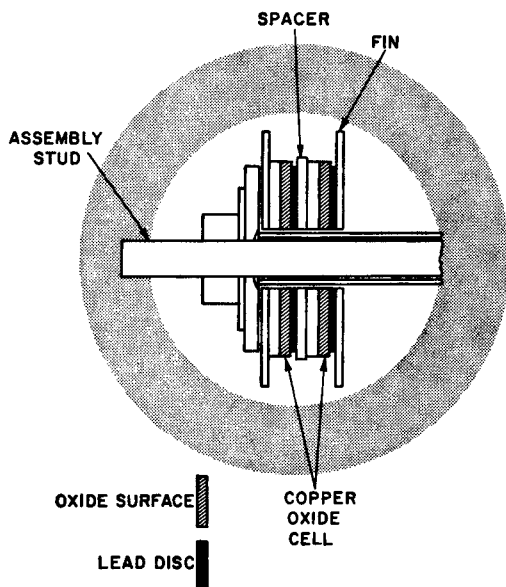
Cutaway of a typical copper-oxide rectifier stack assembly.
